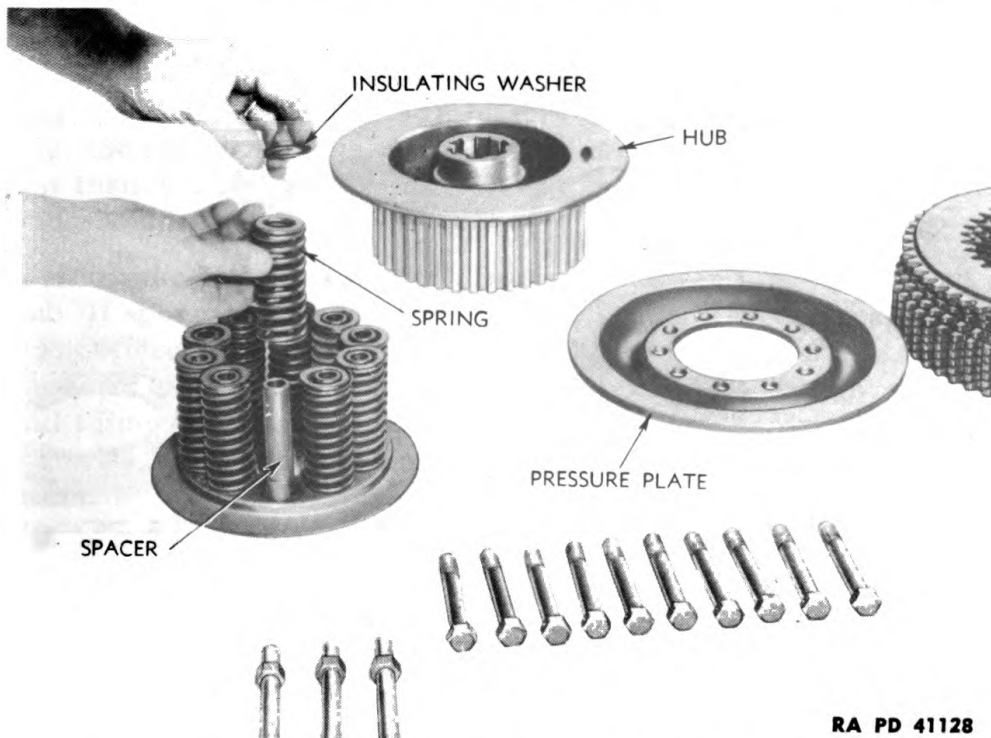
Removing Springs and Insulating Washers from Shifter Plate
